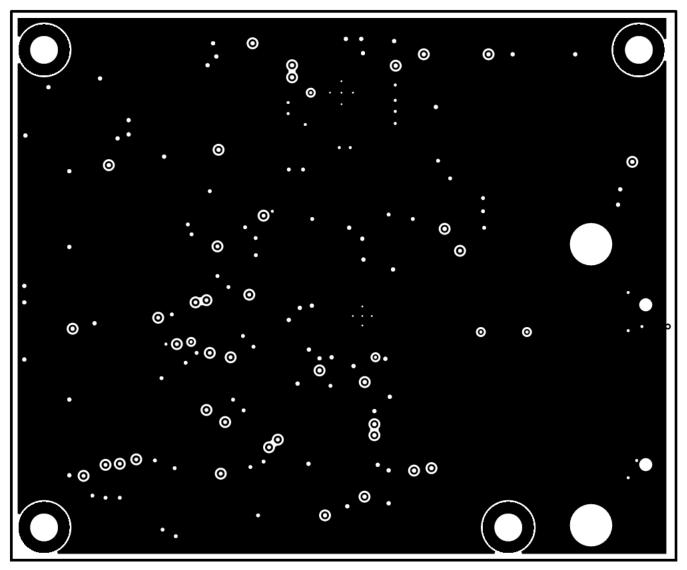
ADS8920BEVM PCB Layer 2: GND Plane
